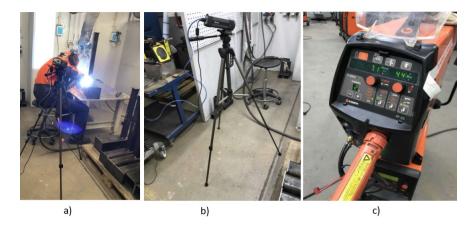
a) welding setup b) thermographic camera c) welding machine and parameters
